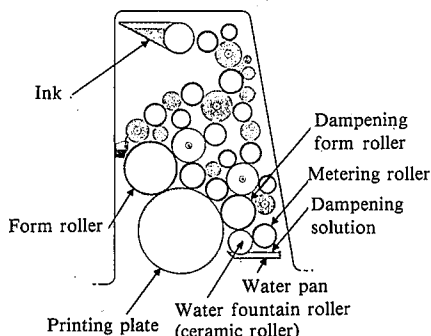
Roller arrangement of offset printing press (Akiyama Bestech)
